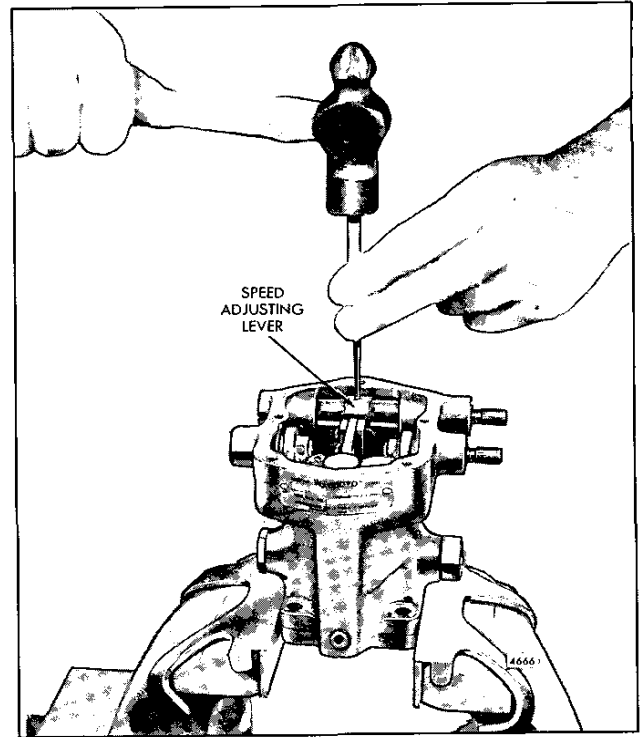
Removing Speed Adjusting Lever Roll Pin
